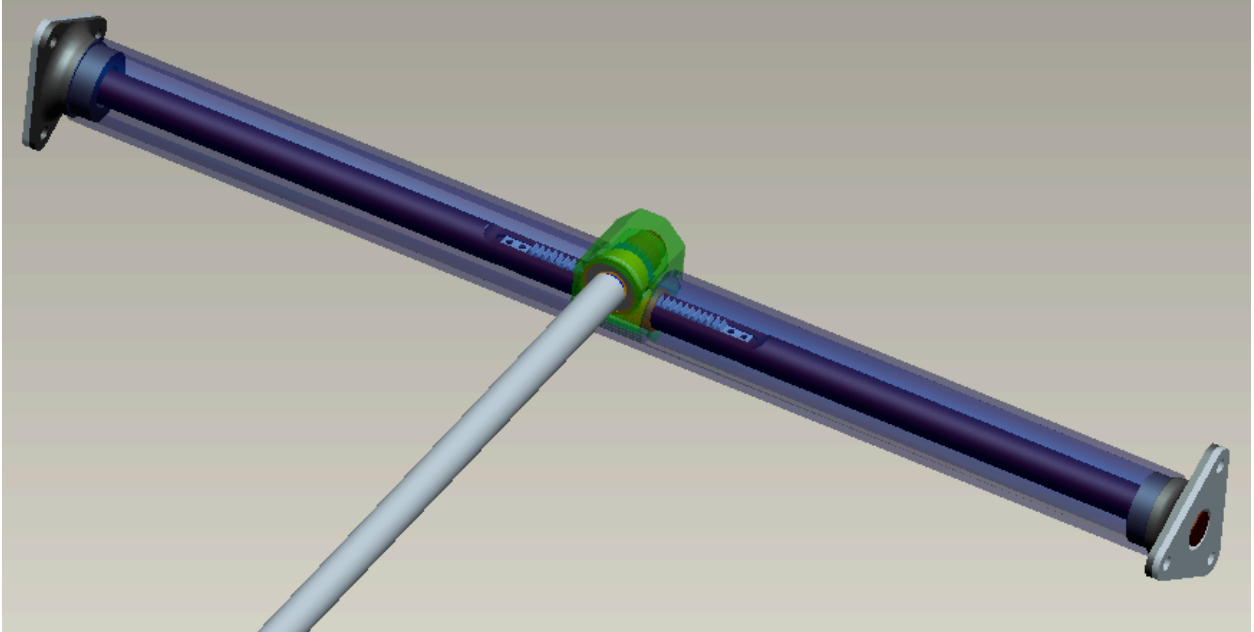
Gear Box with custom rack, rack cover, and chassis attachment brackets
